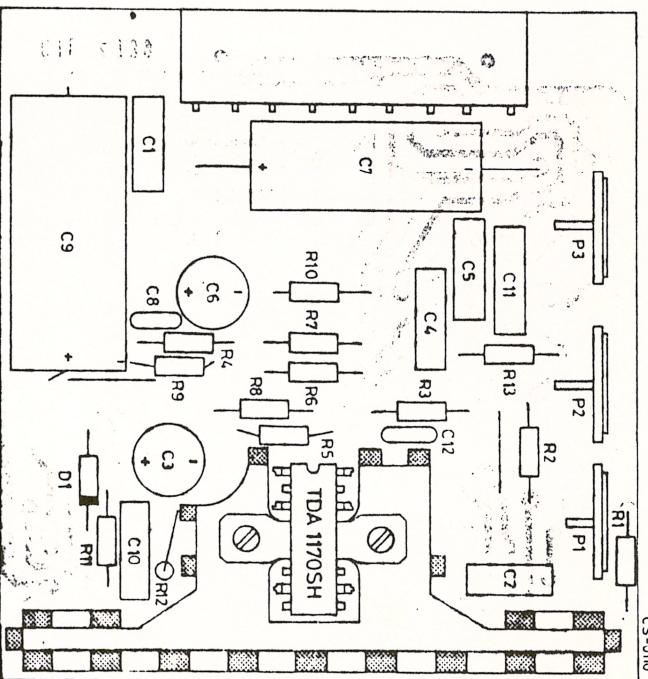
P.C. board and component layout of the circuit of fig. 6 (1 : 1 scale)
